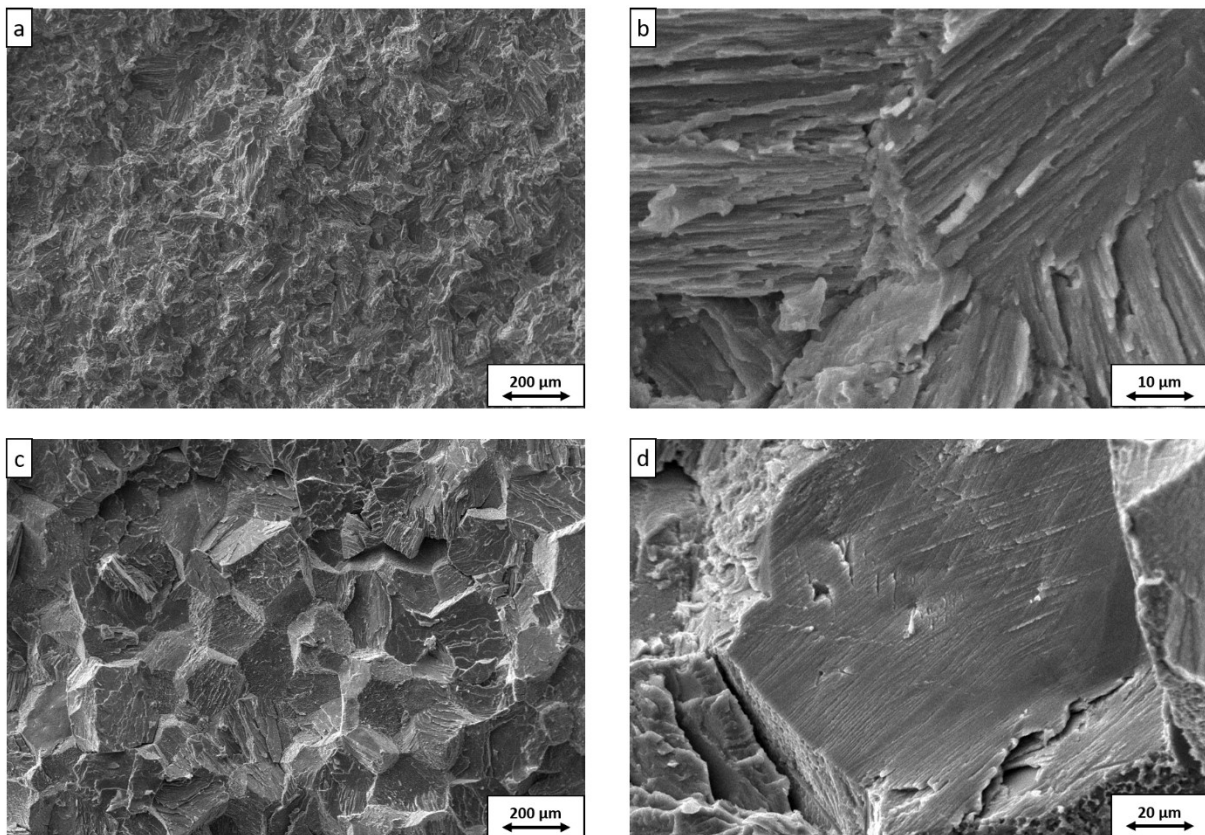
Fracture surfaces of the three-point bending tests: (a) overview of the fracture surface of a representative specimen revealing a brittle transgranular fracture; (b) detailed image of the fracture surface revealing a partly delamination of the single lamellas; (c) overview of the fracture surface of the TNM PM reference specimen revealing an intergranular fracture; (d) detailed image of the fracture surface.
